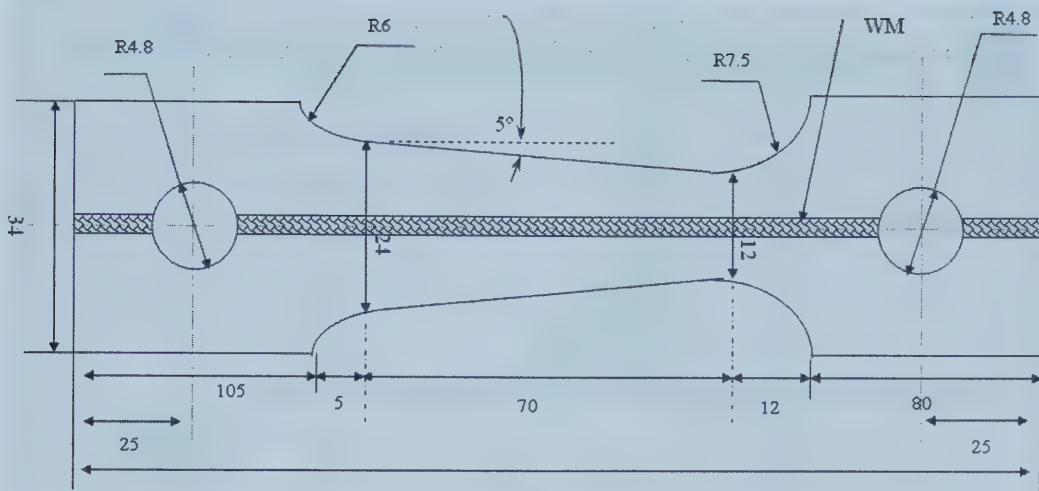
Tapered GTAW specimens with longitudinal weld: dimension in mm
